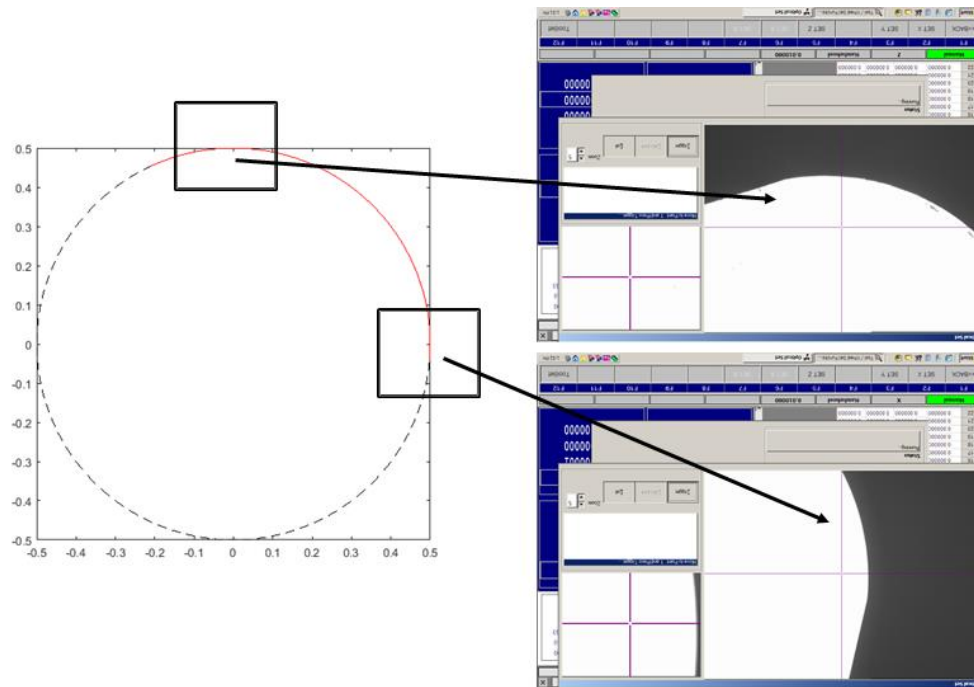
A 0.5 mm radius diamond tool rotated by 35° to cut the vertical side edge of the lens.
